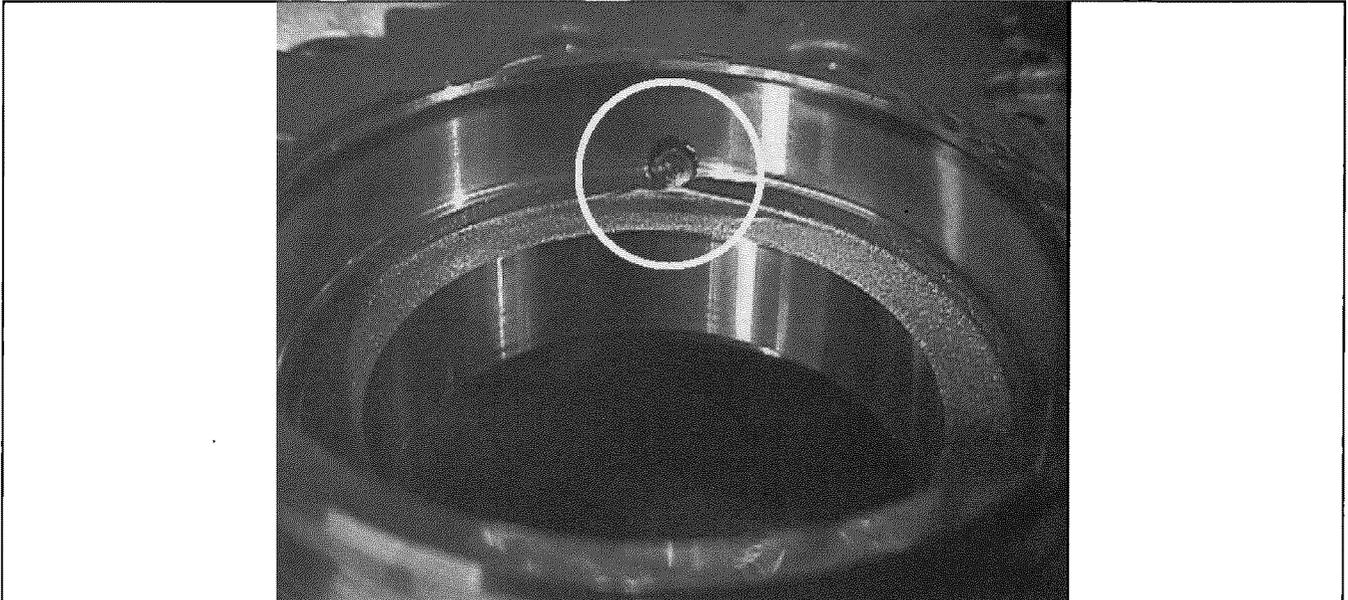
Oil Pump Drain-Back Hole Not Drilled Through
